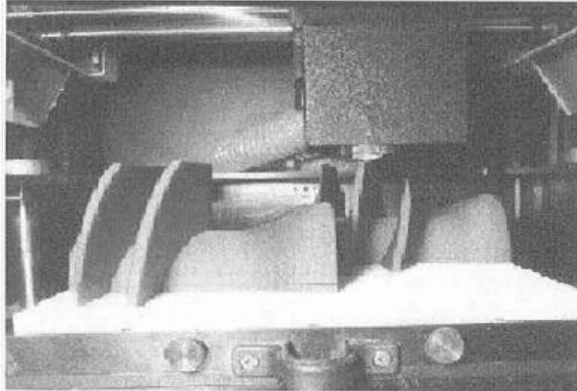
A model is rapid prototyped in wax to be used for investment casting.
